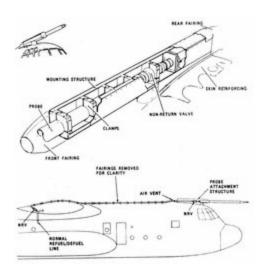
Lockheed C-130 Hercules C Mk 1 receiver probe
